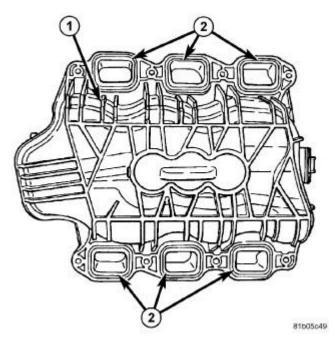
INTAKE MANIFOLD SEALS Courtesy of CHRYSLER LLC
